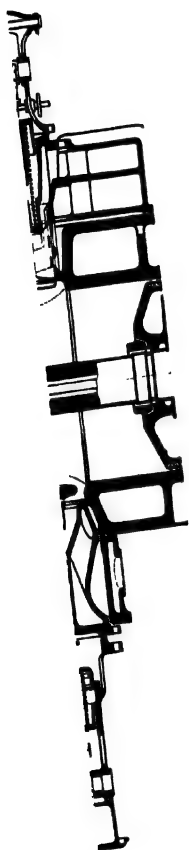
Nurnberger Gas-engine, showing Valve-operating Gear
